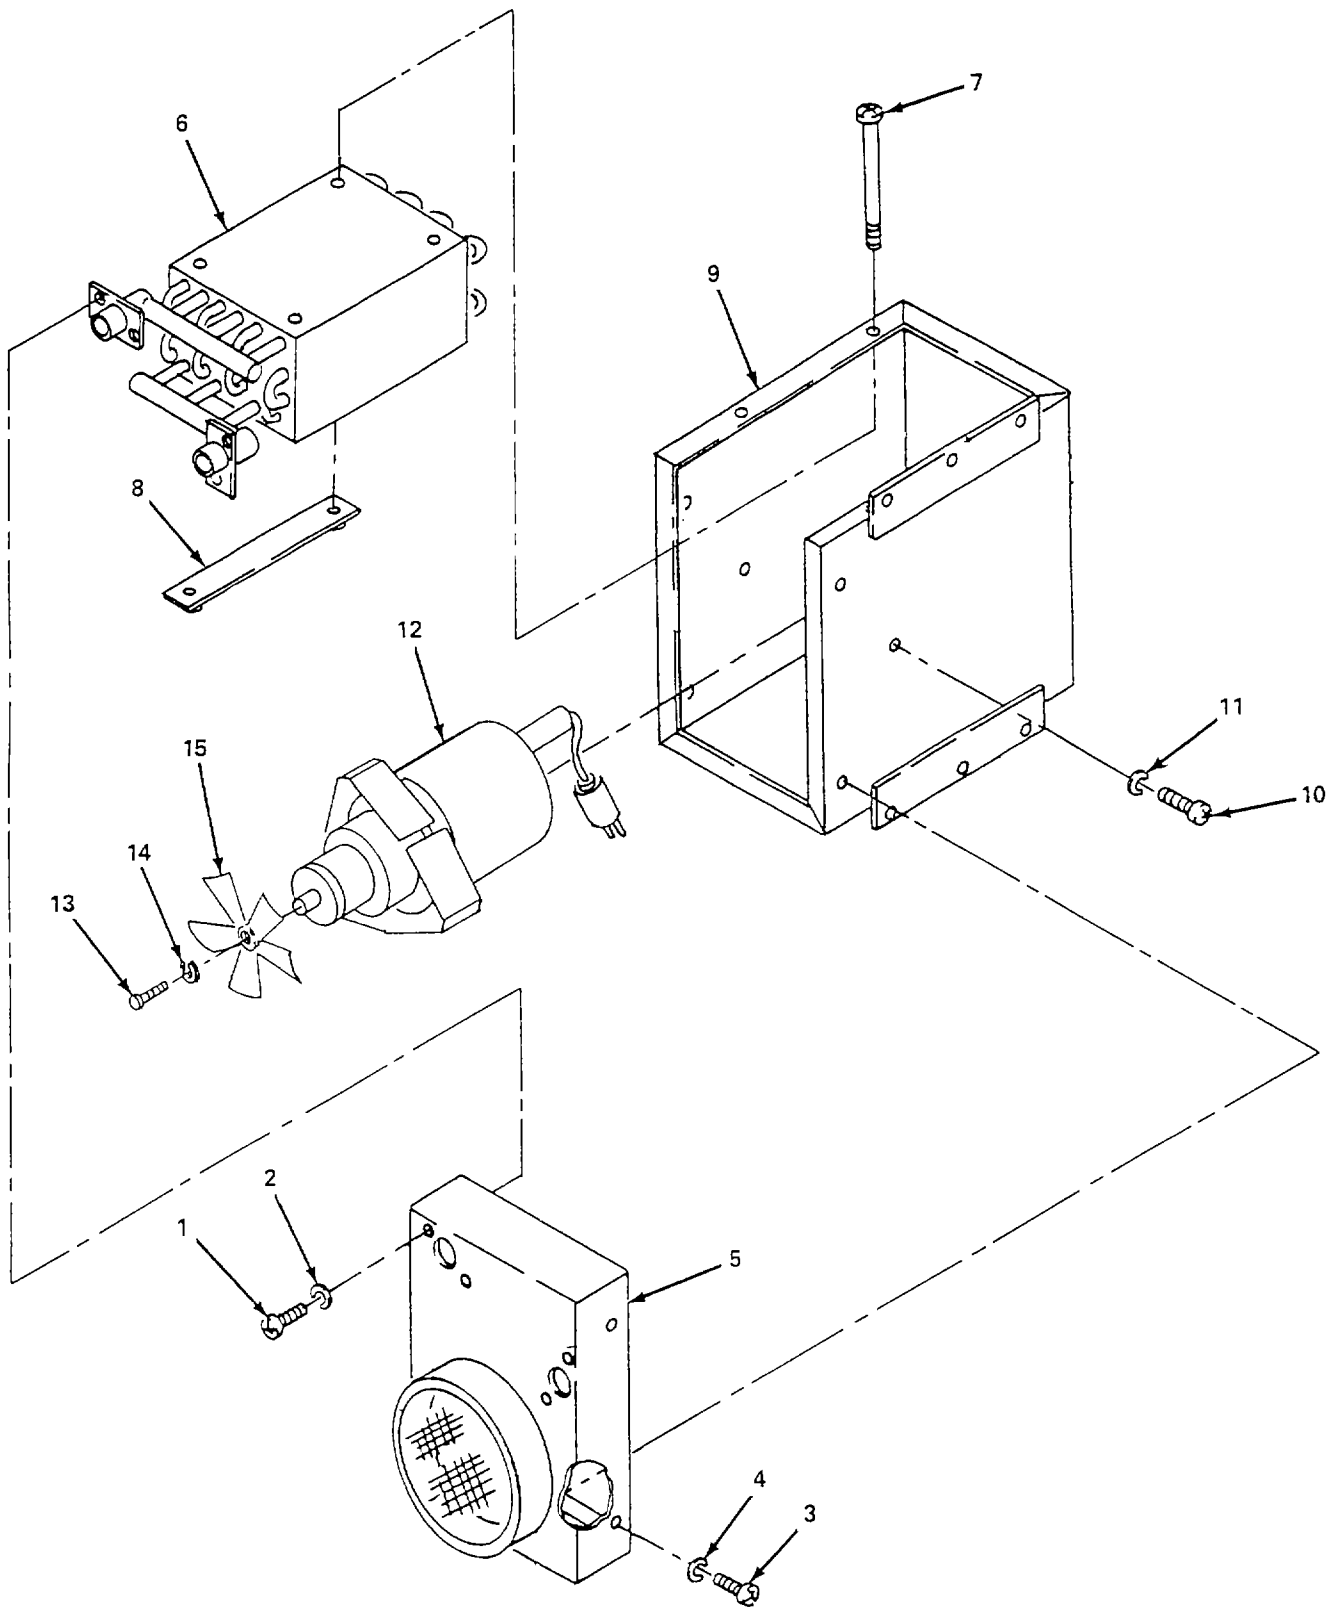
Heater/Chiller Unit Motor, Replace.
